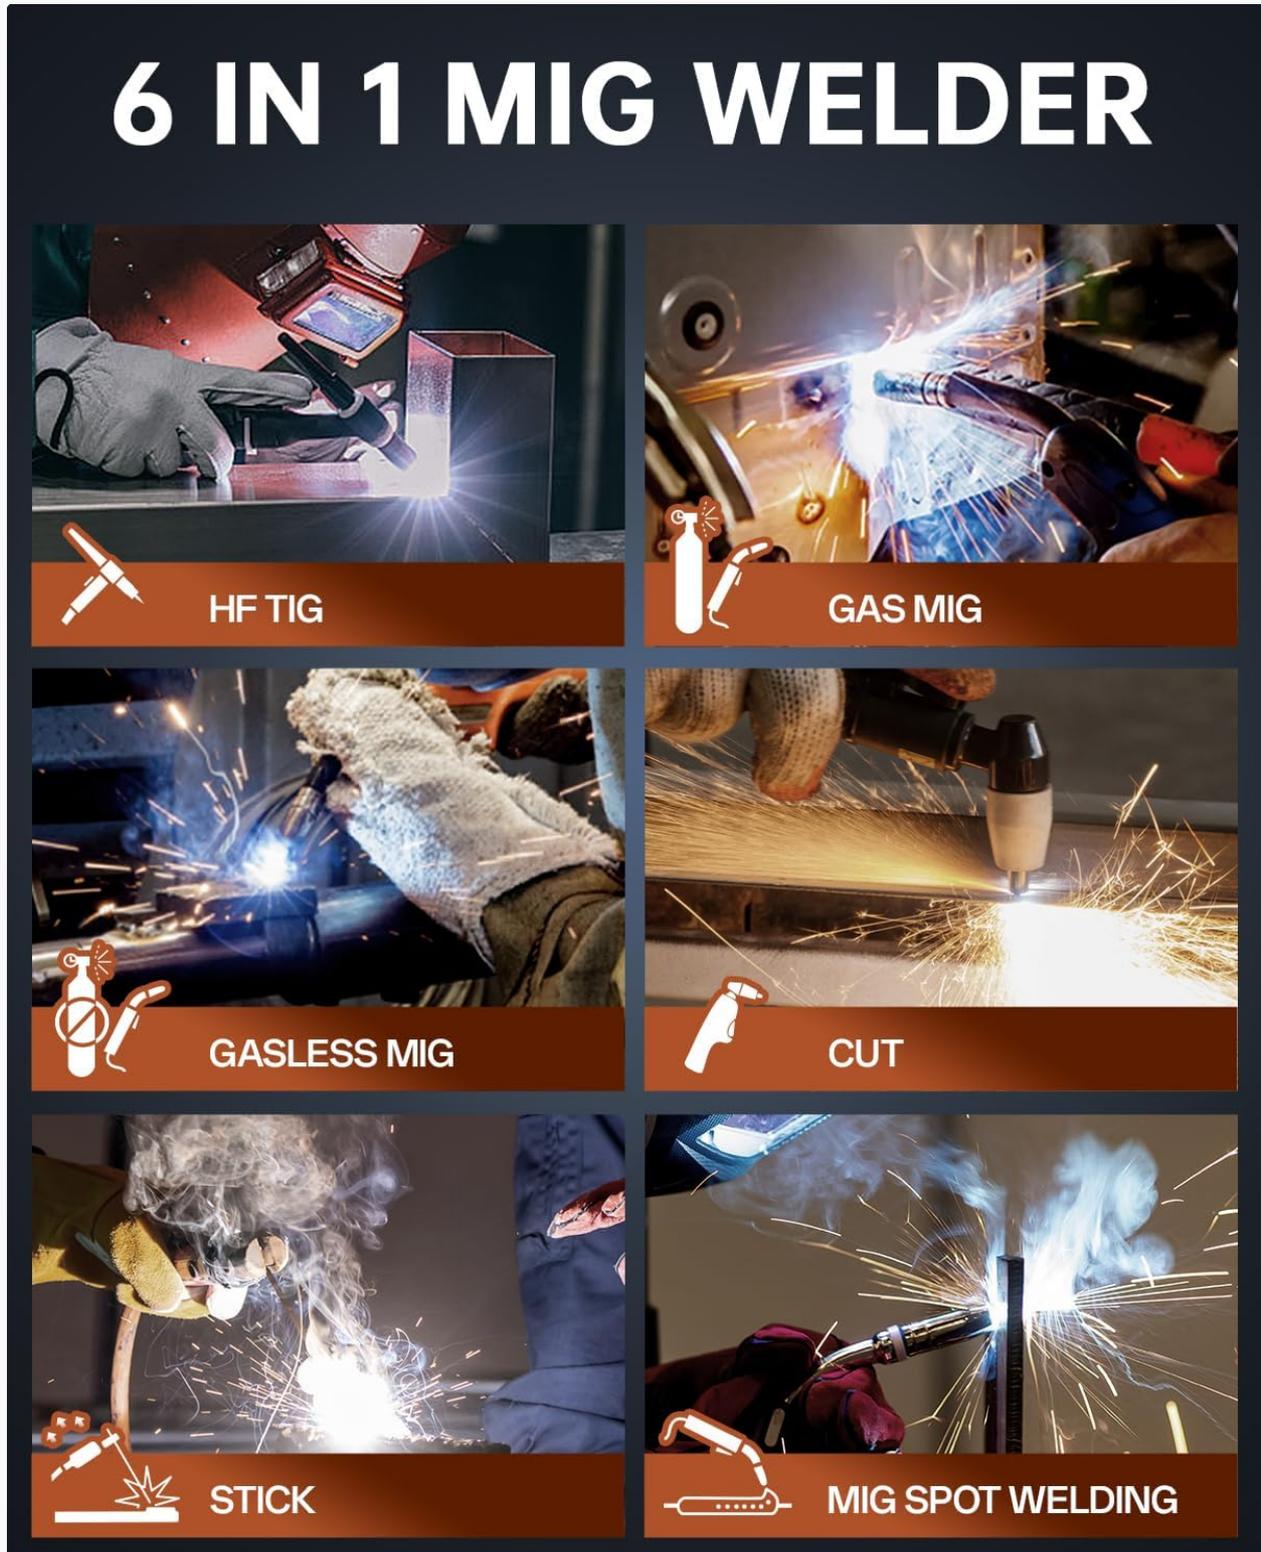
Visual representation of the 6-in-1 capabilities: HF TIG, Gas MIG, Gasless MIG, CUT, STICK, and MIG Spot Welding.
